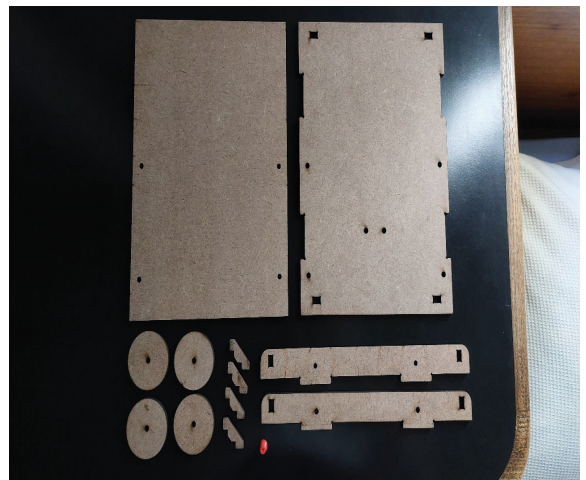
Lifting platform Components produced through laser cutting and 3D printing
